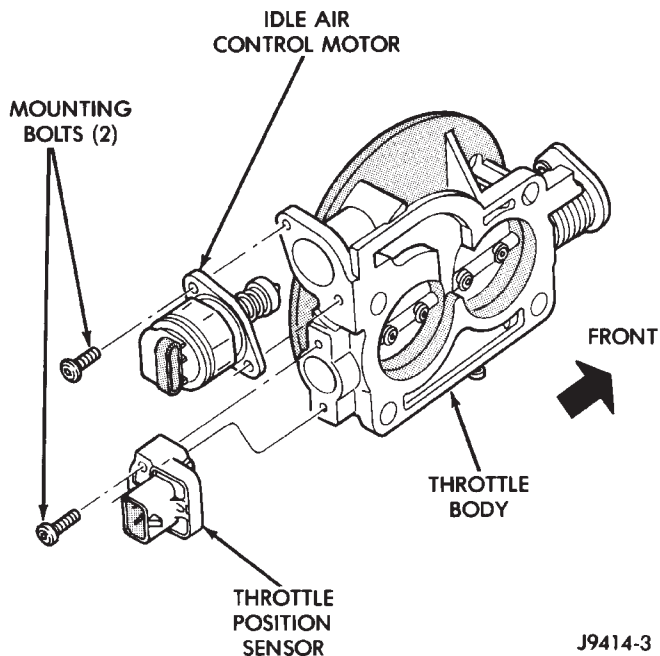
Installation—3.9L/5.2L/5.9L Engines—Typical THROTTLE POSITION SENSOR (TPS)—8.0L ENGINE
